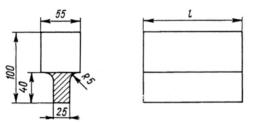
Standard specimen and alternative specimens with dimensions:
